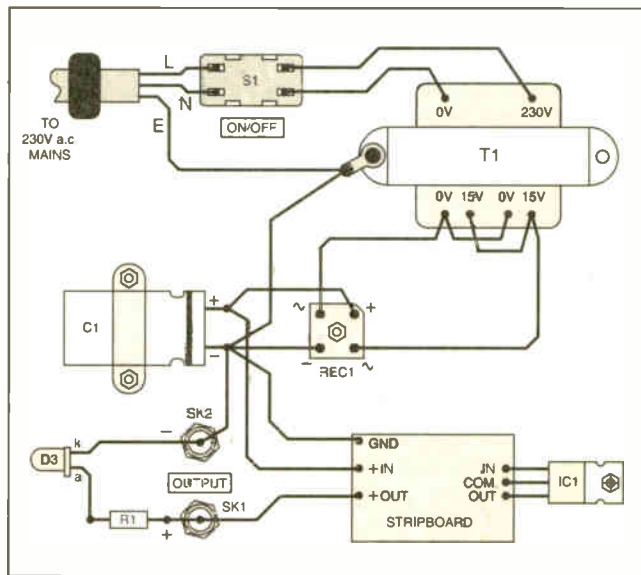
Details of the interwiring between components. The "heavyweight" components are mounted on the base of the aluminium box - see facing photograph.
